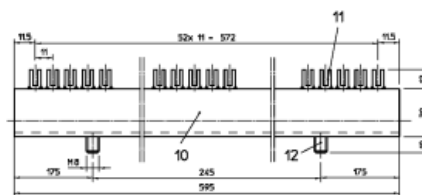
An extract from the design drawing showing the U-shaped guides for the sides of the panels. These structures are bolted to the shroud (Appendix C)
